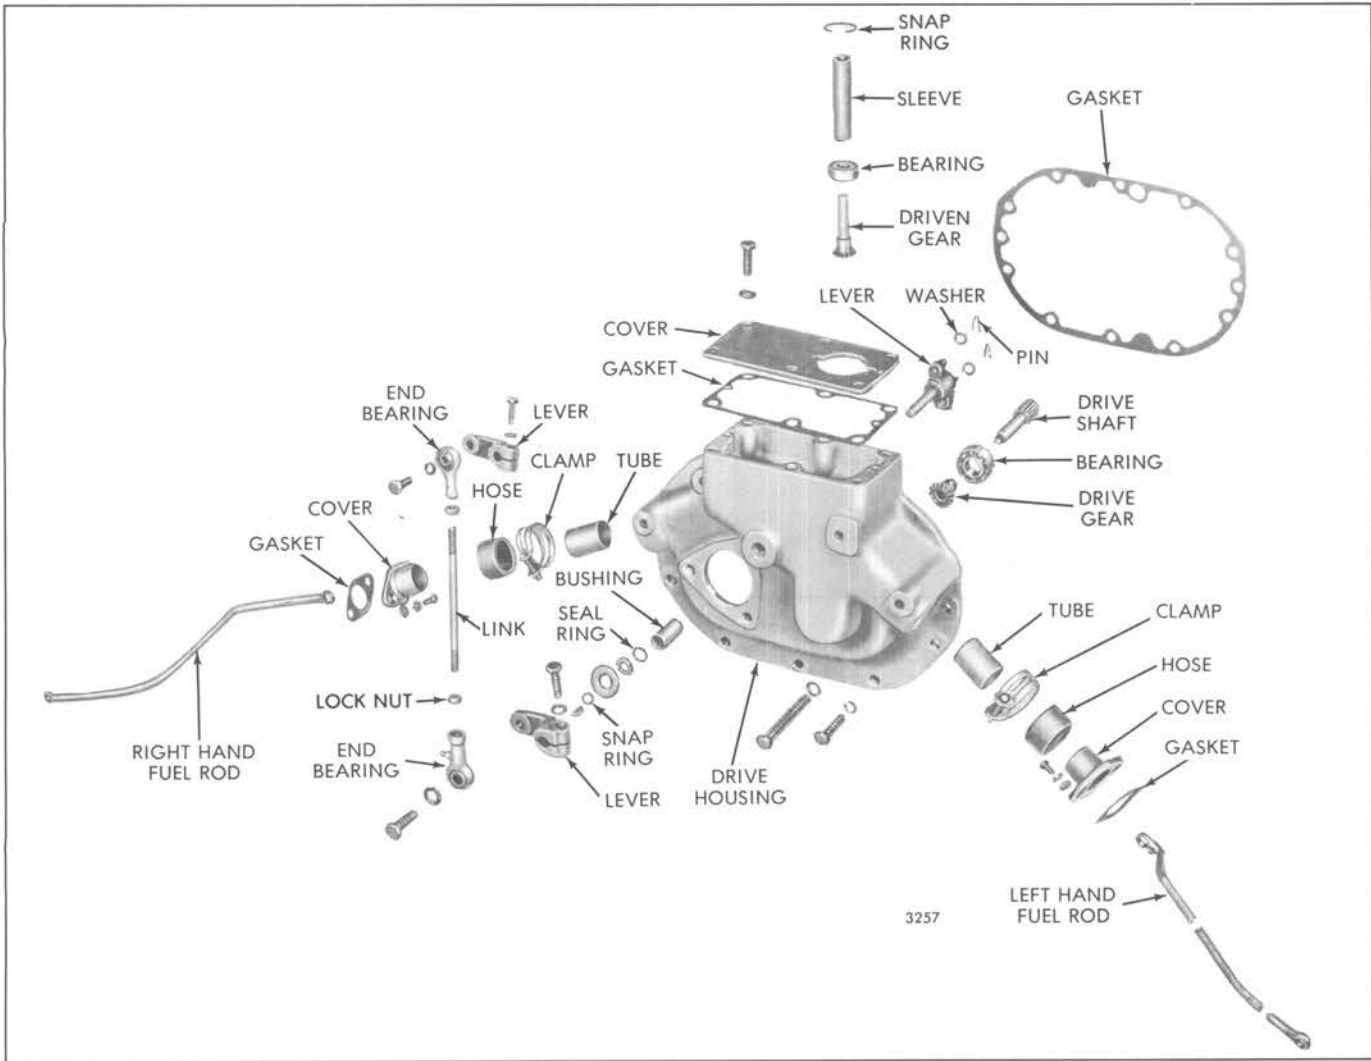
Details of Hydraulic Governor Drive and Relative Location of Parts
